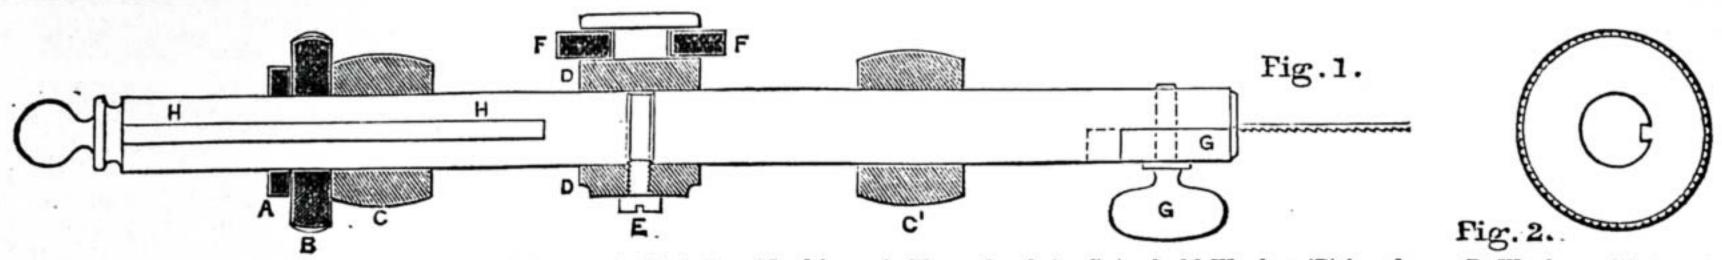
Needle Bar of Sewing Machine altered for use in Fret-Saw Machine—A, Piece fixed to C to hold Washer (B) in place; B, Washer with knurled edge, shown in plan in Fig. 2; C C', Bearings through which Bar is driven up and down; D D, Connecting Piece; E, One of the three Set Screws. the points of which project into the Groove in the Bar, and carry it up and down while permitting it to revolve axially; FF, Part Section of the Lever by which the Bar is driven up and down through the Connecting Piece, D D; G G, Small Vice at End to hold the Saw; H H, Keyway by which Bar is revolved while in motion up and down.
